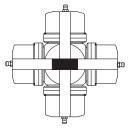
Use the installed grease fittings for lubricating journal cross assemblies
